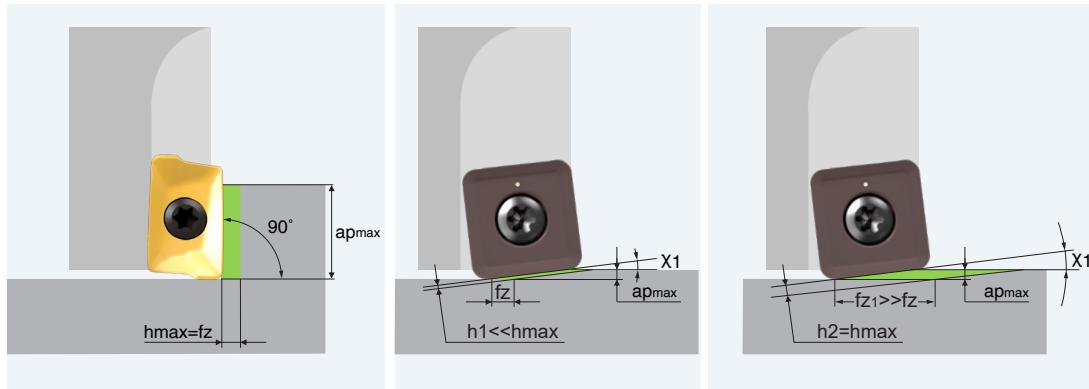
Geometrical relations between feed per tooth, cutting edge angle and chip thickness
